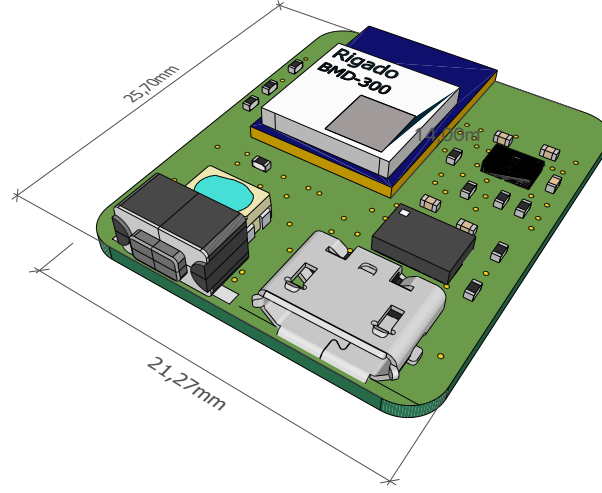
Printed Circuit Board (PCB) of the developed IMU sensor with dimensions.
